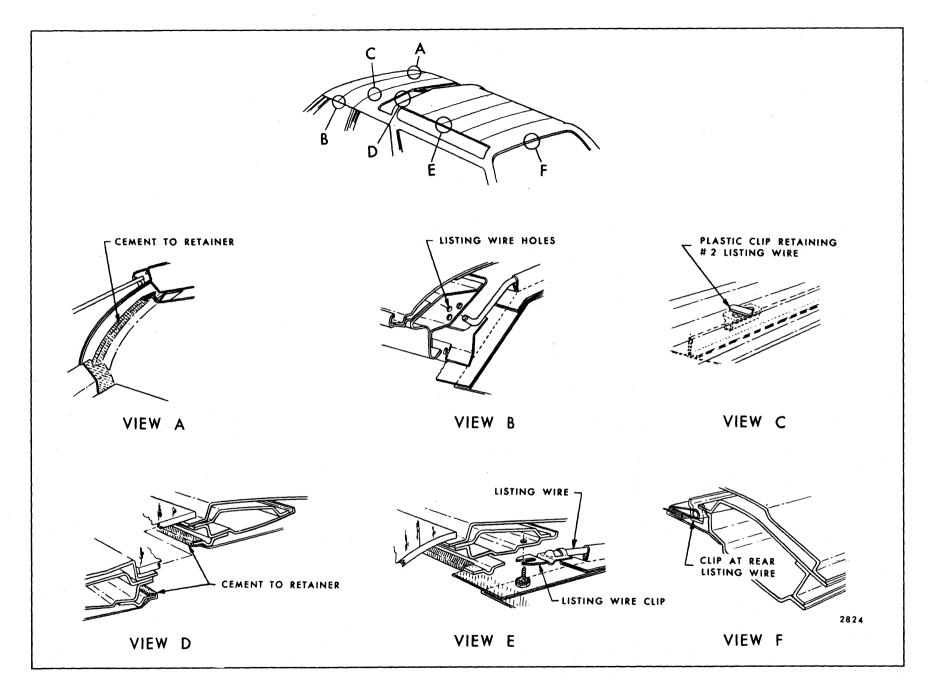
Headlining Installation "55, 65, 56, & 66" Styles
